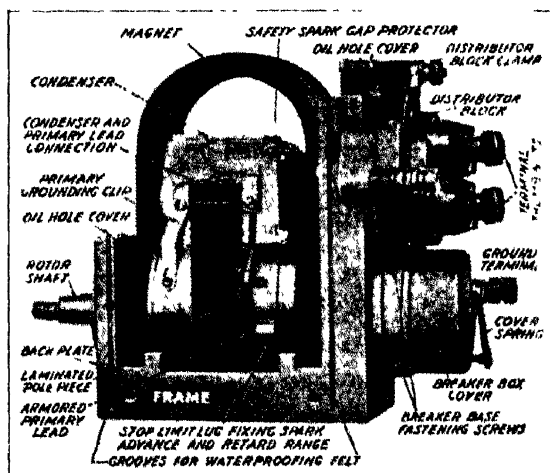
Assembly side view of Dixie high-tension magneto showing principal details of construction, one magnet having been removed.
